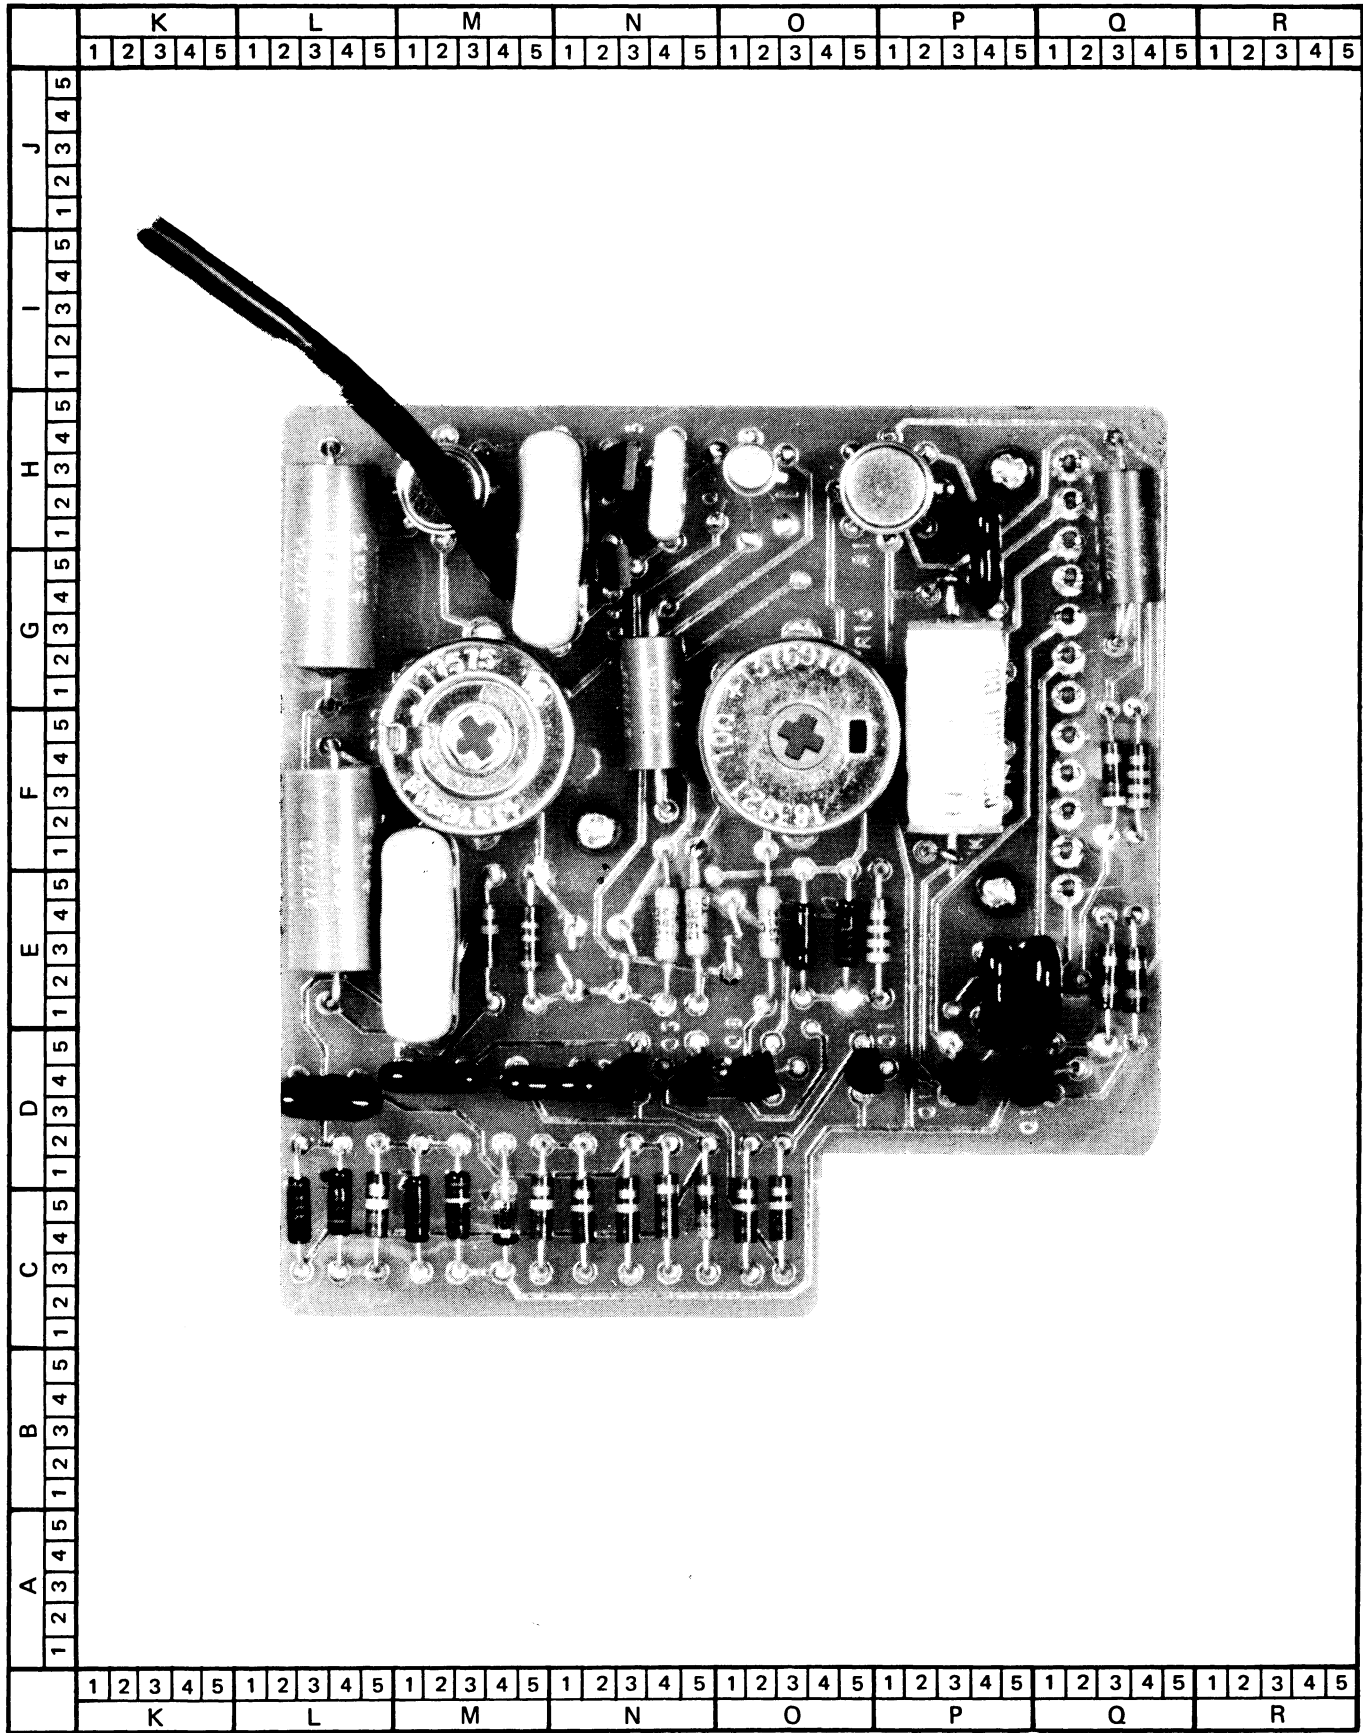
DC EXTERNAL REFERENCE P/C ASSEMBLY
